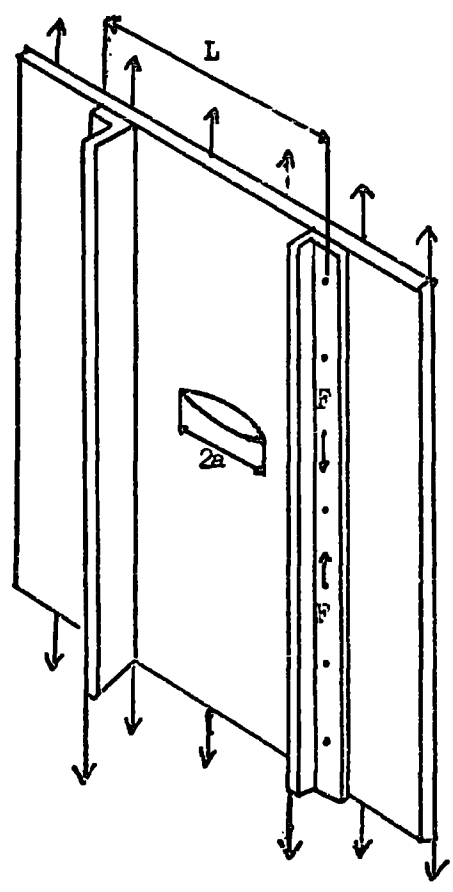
Riveted Stiffener Crack Arresters.
